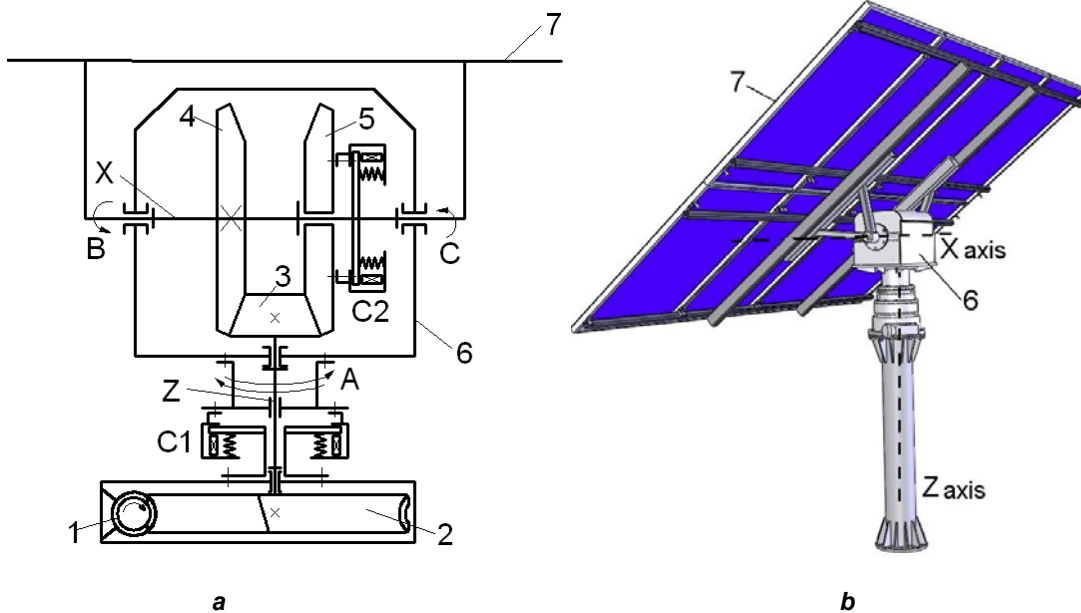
Azimuthal tracking system (a – structural scheme, b – assemble view)
